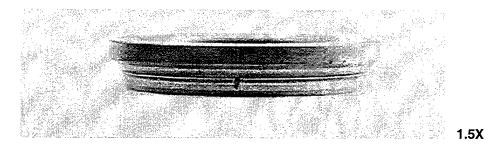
Photo of TDC Coated Bearing Spall Failure at 500.8 Hours.
